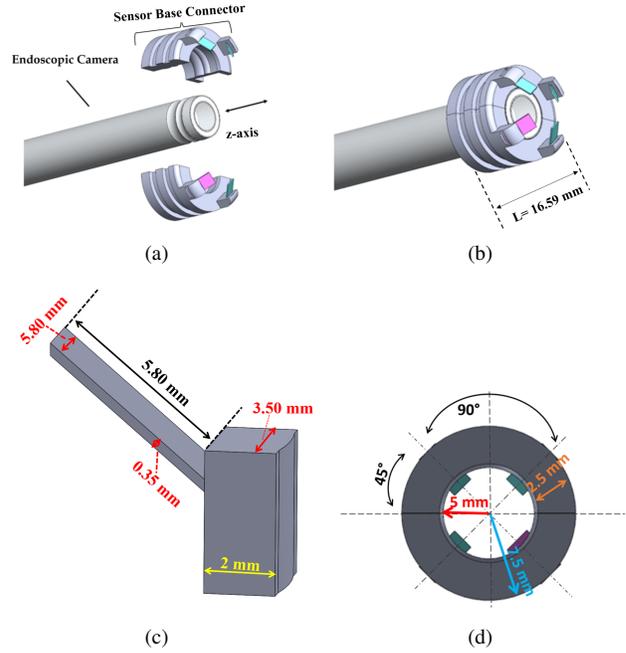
CAD Drawing: (a) Exploded view of the prototype. (b) Sensor assembled at the tip of an endoscopic camera. (c) Specification of the cantilever. (d) Camera field of view.
